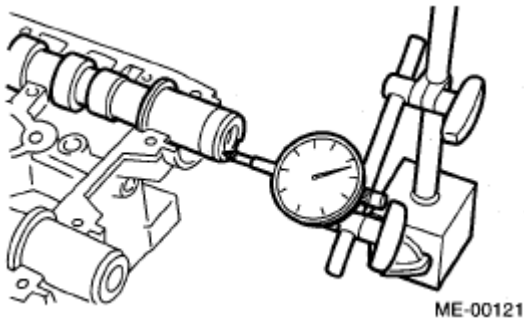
Measuring Thrust Clearance Of Camshaft Using Dial Gauge
